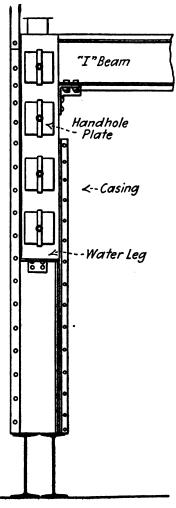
Sketch of Bottom Part of Casing Showing Back Water Leg
